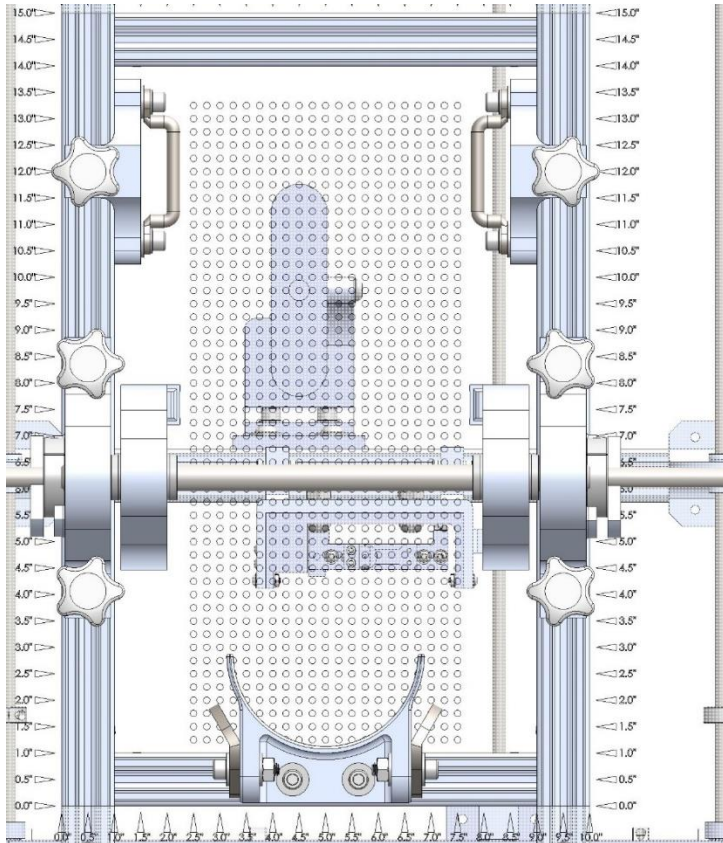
Mk1 Foot Clamp Subassembly Mounted on Front of the Automated Tool
